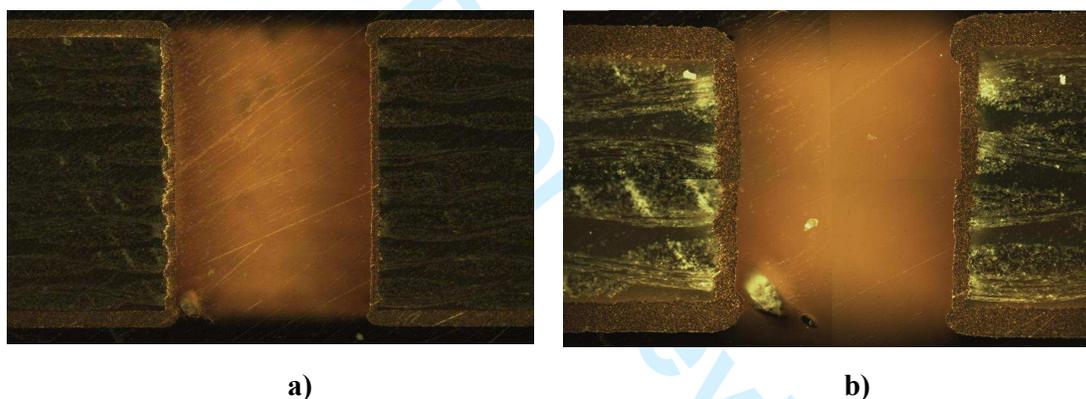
Microsection of the PCB's 1.1 mm diameter through hole with copper coating inside: a) overview; b) four zones of the section adjacent to PCB's surfaces composed in one picture and enlarged 2.5 times to picture (a). Maximal and minimal values of coating differ each other more than five times, standard deviation is 14%
